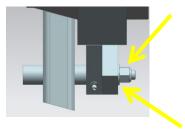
Nut, Washer, and Clamp Ring Pivot Pin
